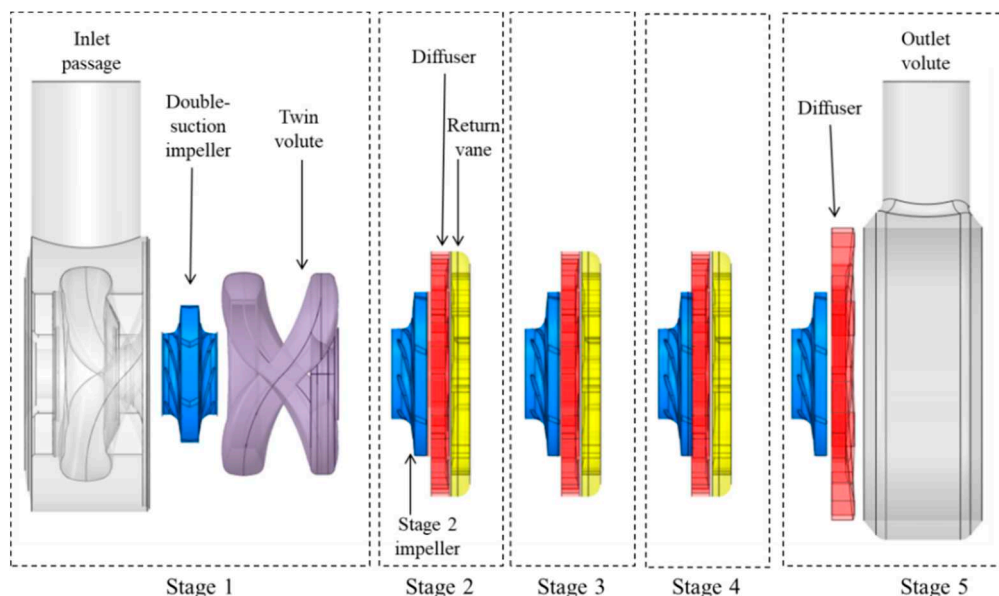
Exploded view of the multistage centrifugal pump and its components.
